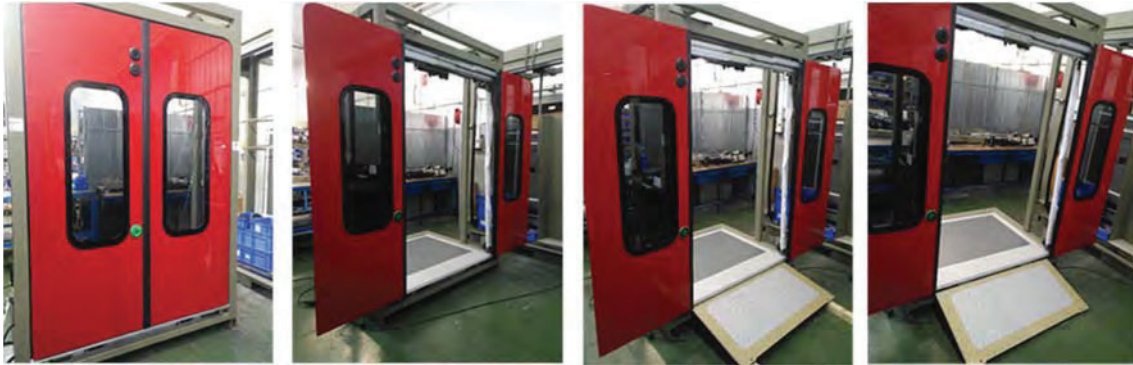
Mock-up installed on-site at the manufacturer's plant (photo: Masats)
